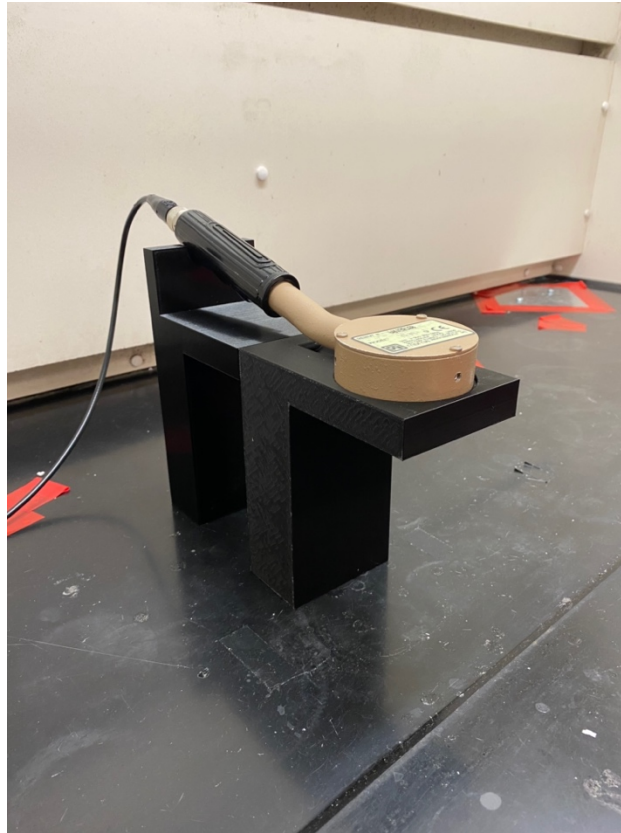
The completed assembly of the GM detector probe holder with the front piece inserted into the back piece.
